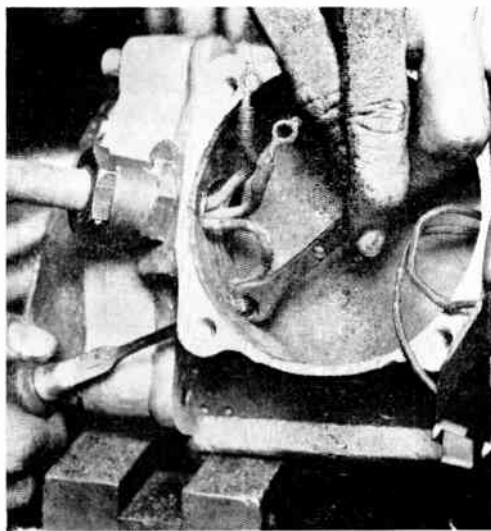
CONNECTING UP THE EARTH WIRE TO THE SWITCH HOUSING.
